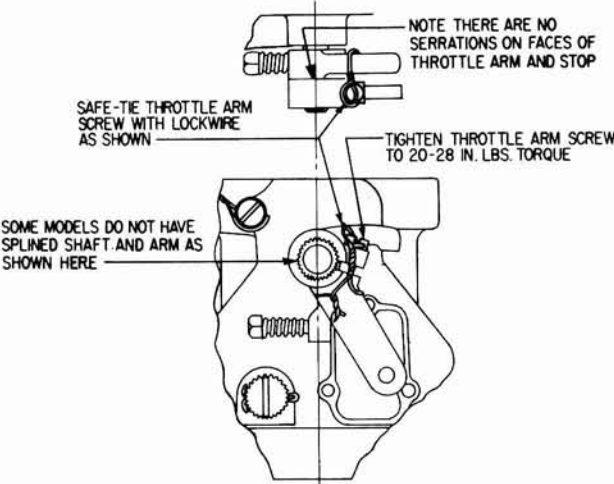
Previous Throttle Arm Configuration Showing Clamping Screw and Lockwire
